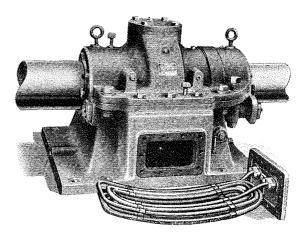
Style GF thrust bearing, showing shape of cooling coil when used.
